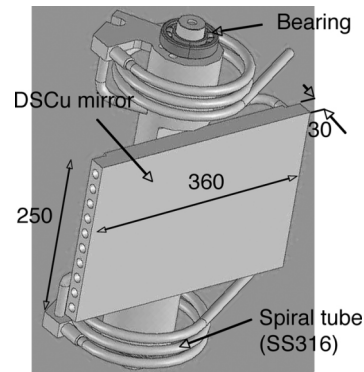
Drawing of the steering mirror for ITER millimeter wave launcher.
